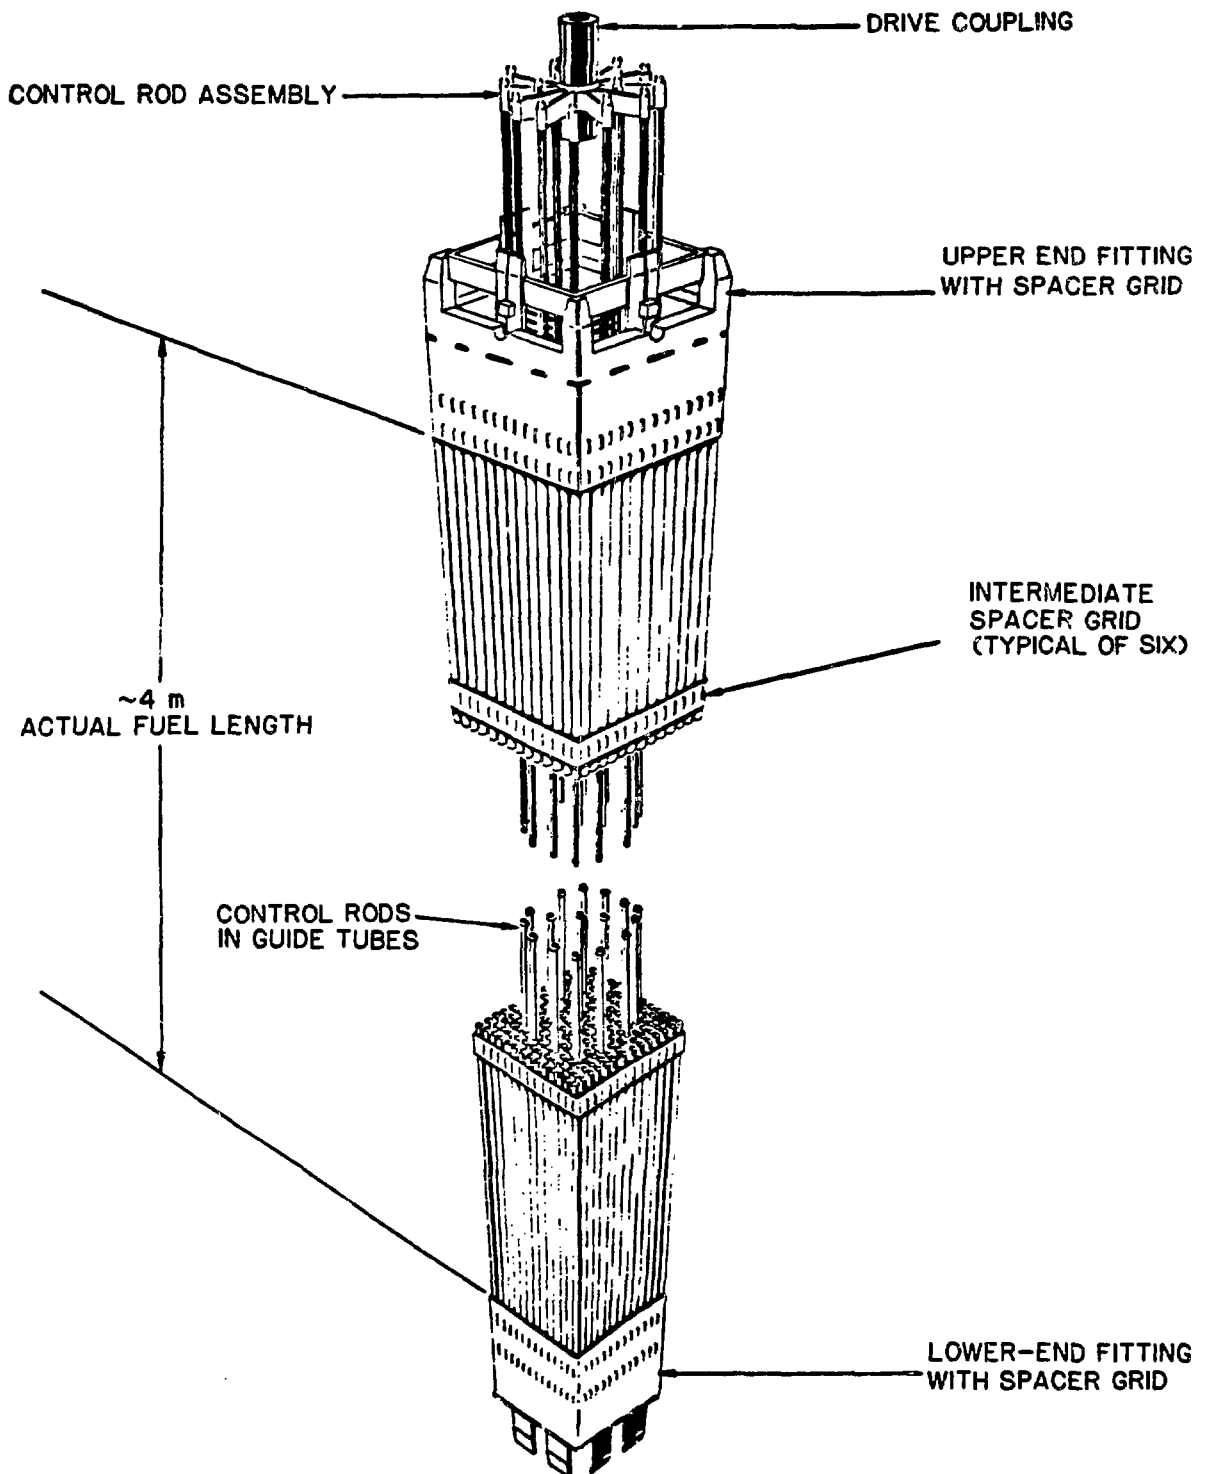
PWR fuel assembly - cutaway showing partially inserted control rod assembly.⁴
